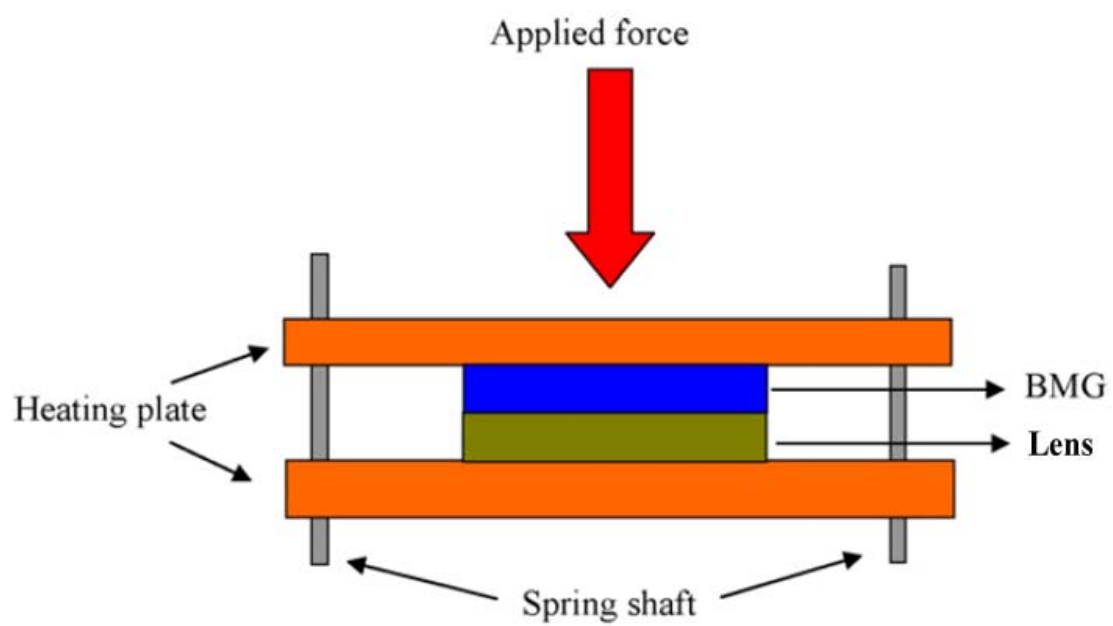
Hot embossing set-up for oil hydraulic system [92].
